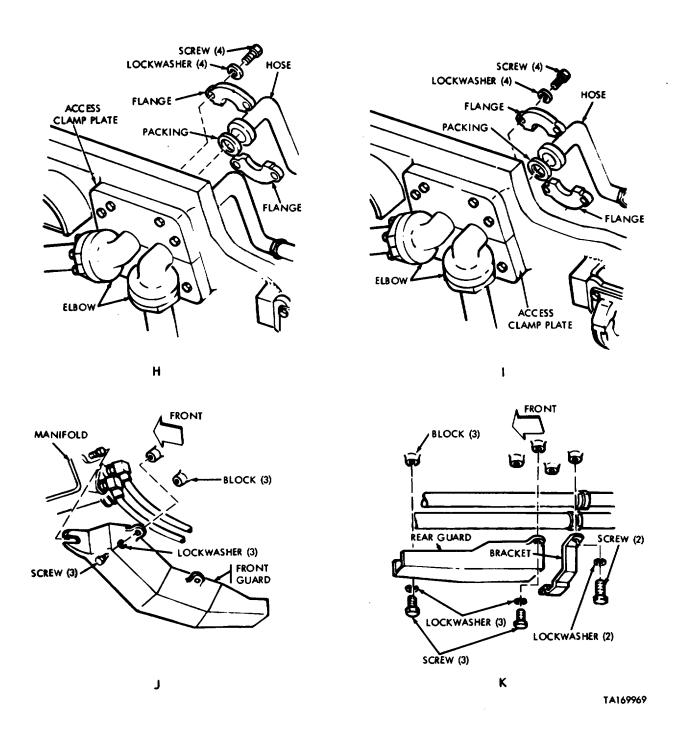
Removal or installation of rear tube assemblies (sheet 3 of 3).
